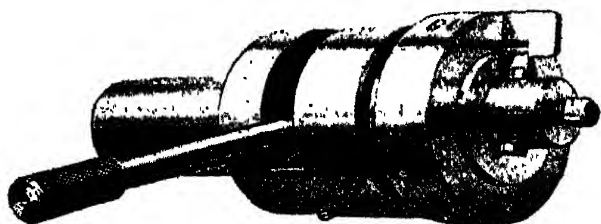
RECESSING TOOL SHOWING GAUGES FOR DETERMINING DEPTH OF RECESS
